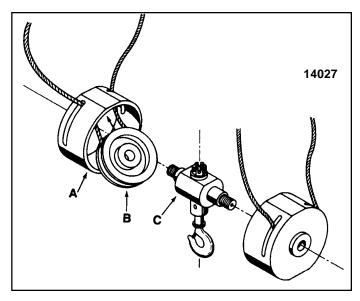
Assembly of Load Block Two Part Double Reeved
